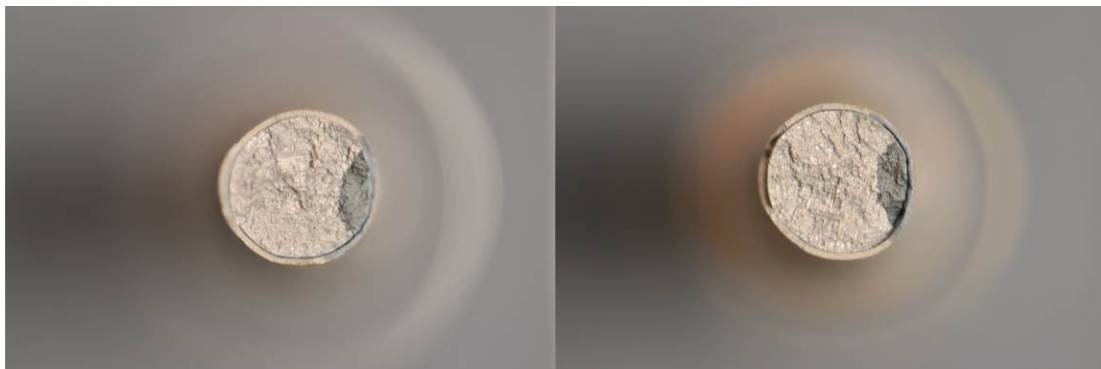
Aspect of fracture surfaces on the two parts of broken specimen R262-6
